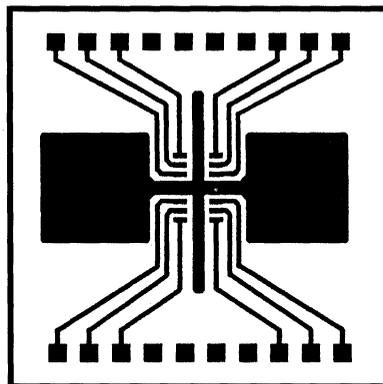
Typical surface-mount pc-board design for power leadframe SOIC packages.
